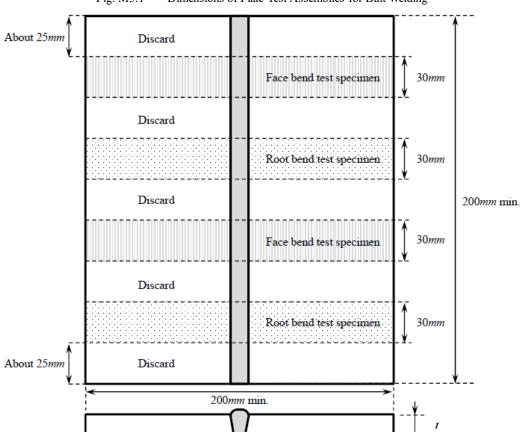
Dimensions of Plate Test Assemblies for Butt Welding
